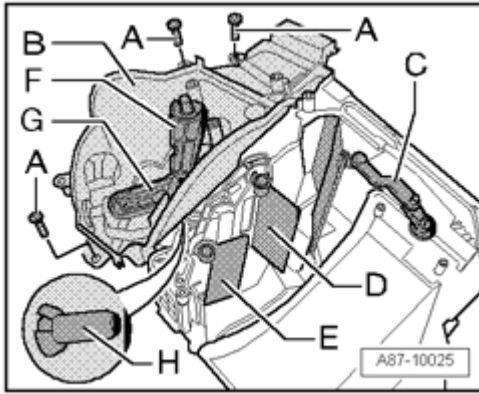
Identifying Bolts, Cover, Recirculated Air Flap, And Fresh-Air/Air Flow Flaps
